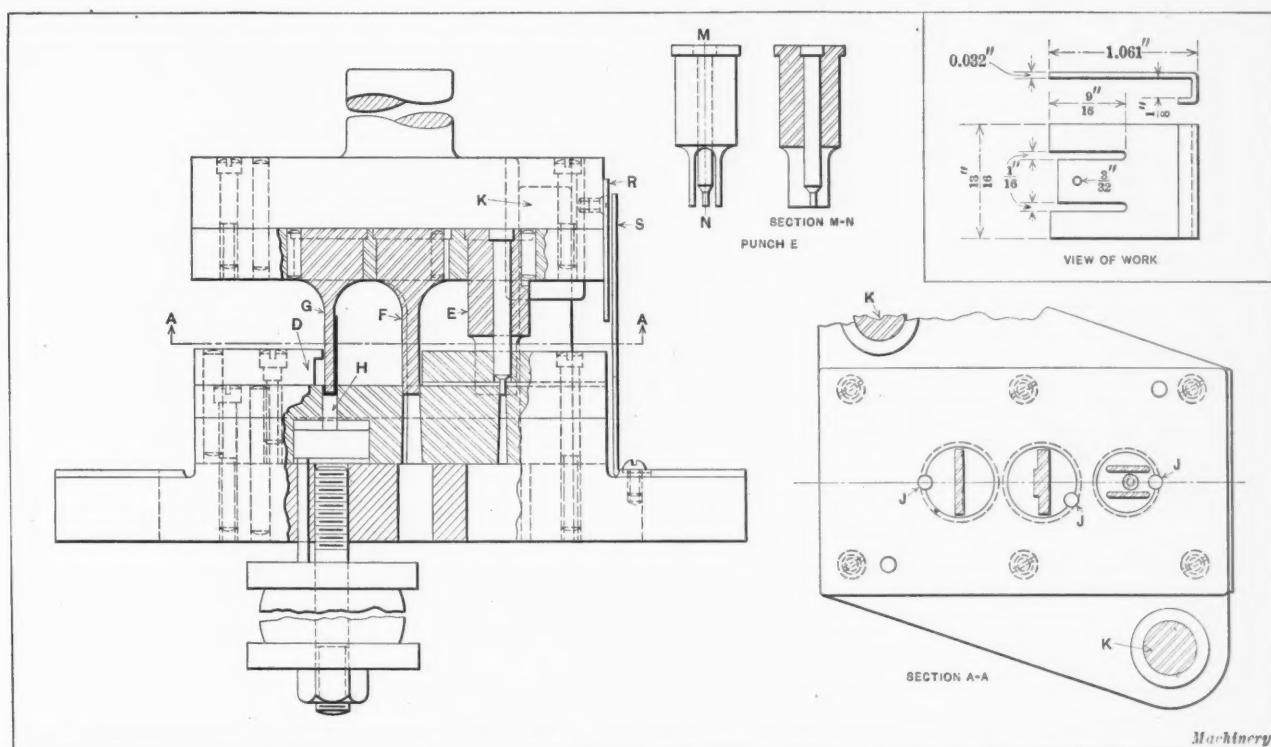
Die for piercing, cutting off and forming Connector shown completed in Fig. 6
